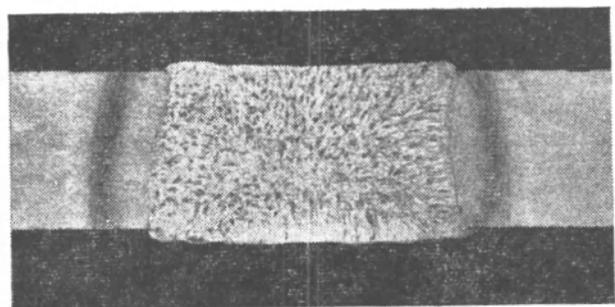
Typical appearance of a high speed consumable guide weld.
